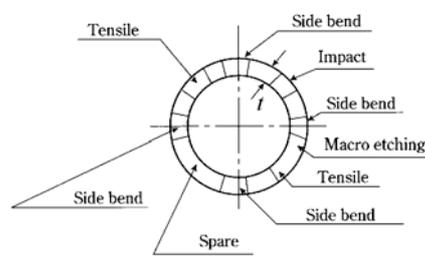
(a) Welding Procedure Qualification Test assemblies (Unit: mm)
